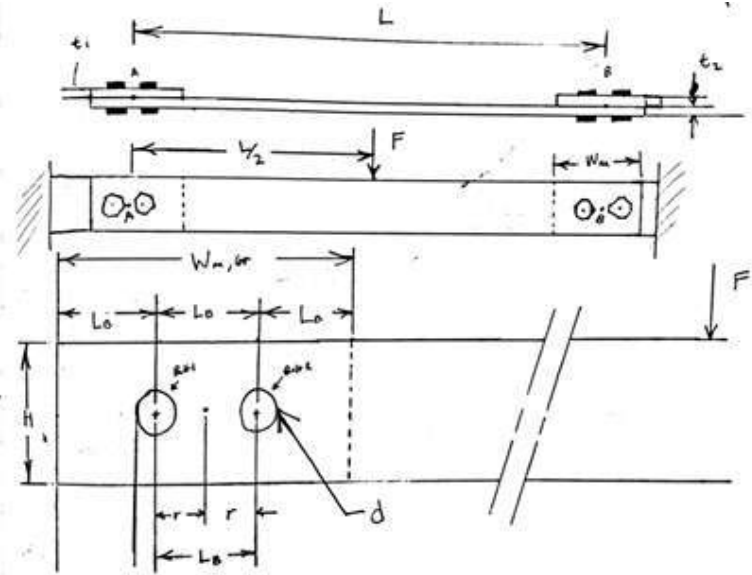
Drawing of an eccentric loading acting on two bolted ends.
